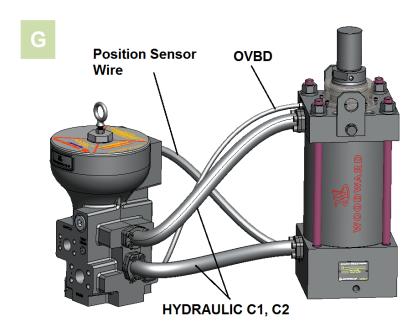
Remove PCB Cover and Disconnect Cylinder Position Sensor Wires
